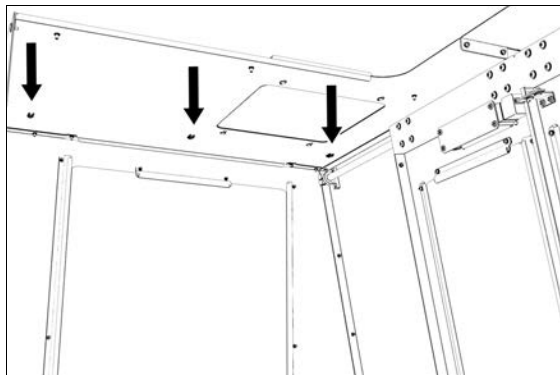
Three cable tie anchors installed inside the right side of the enclosure.
